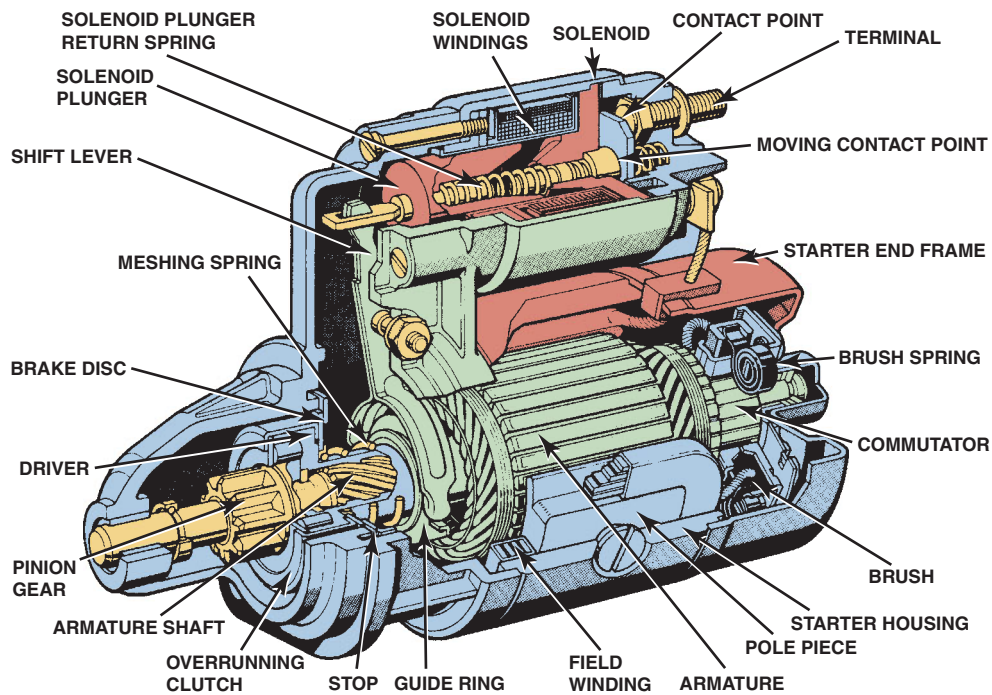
A cutaway of a typical starter motor showing the commutator, brushes, and brush spring.
